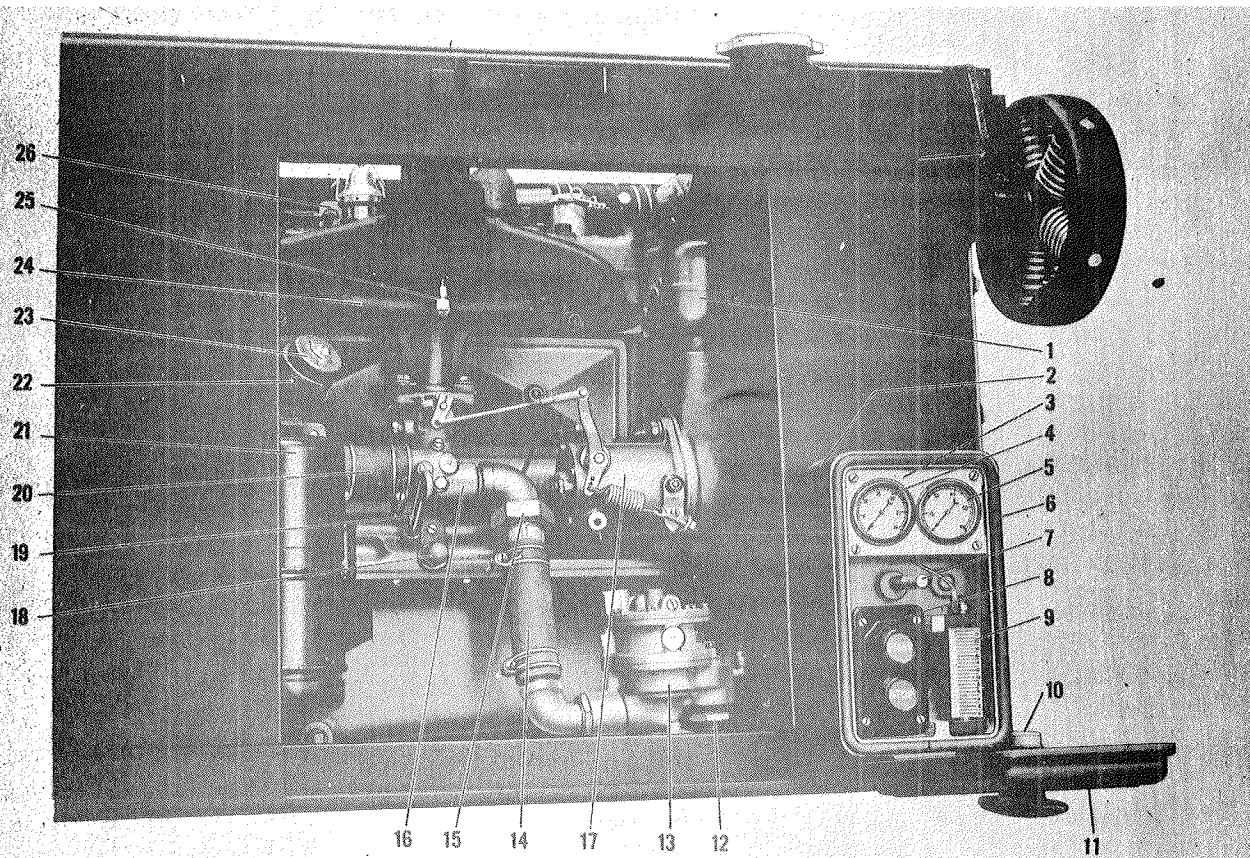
CARBURETOR SIDE VIEW OF ENGINE-GENERATOR
